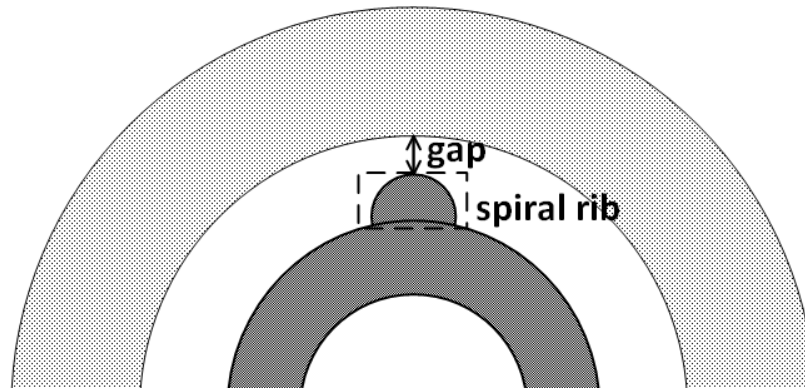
Gap between the spiral rib and the outer pipe wall
